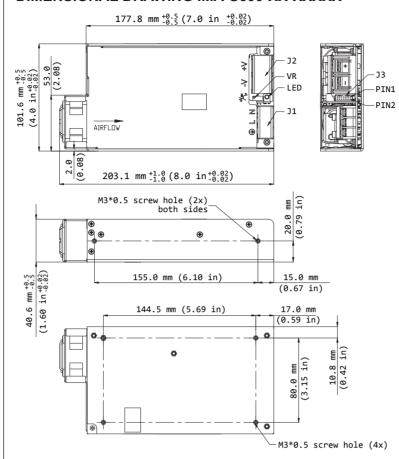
Dimensional drawing IMA-S600-xx-xxxxx
